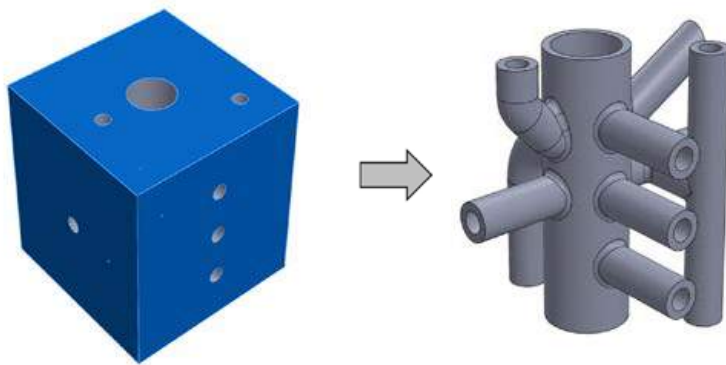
Manifold design before and after the shell operation on the manifold block design
